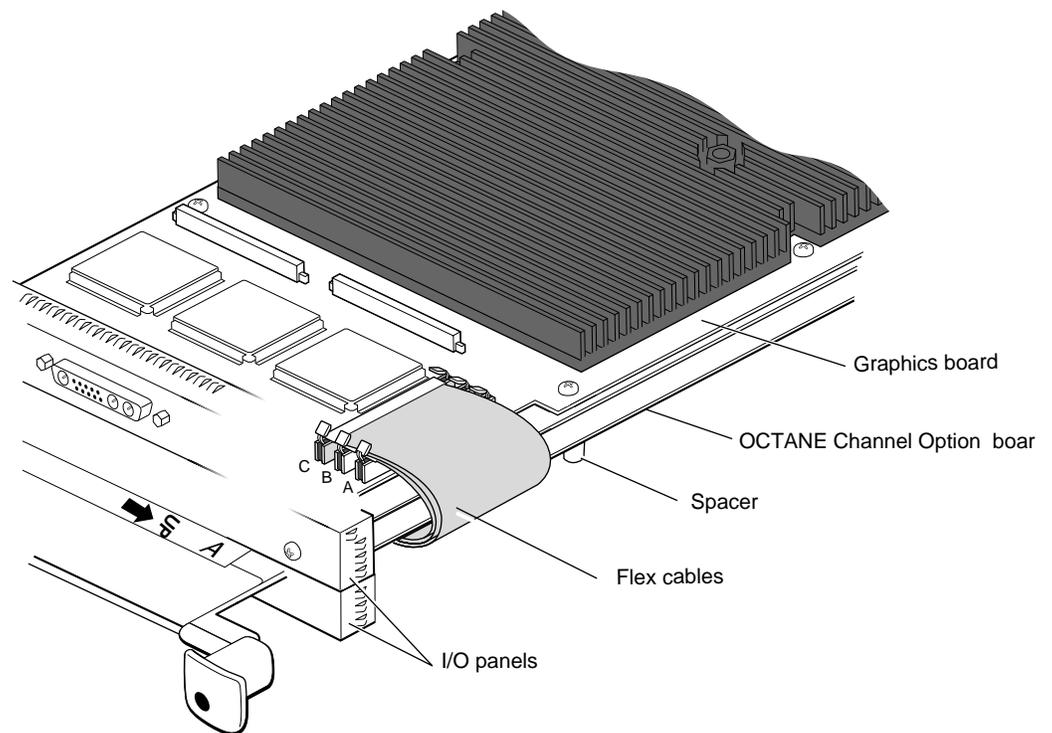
Attaching the Flex Cables to the Graphics Board
